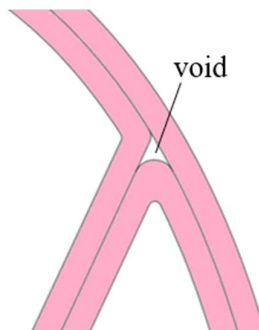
A schematic of void formation among adjacent weld beads
